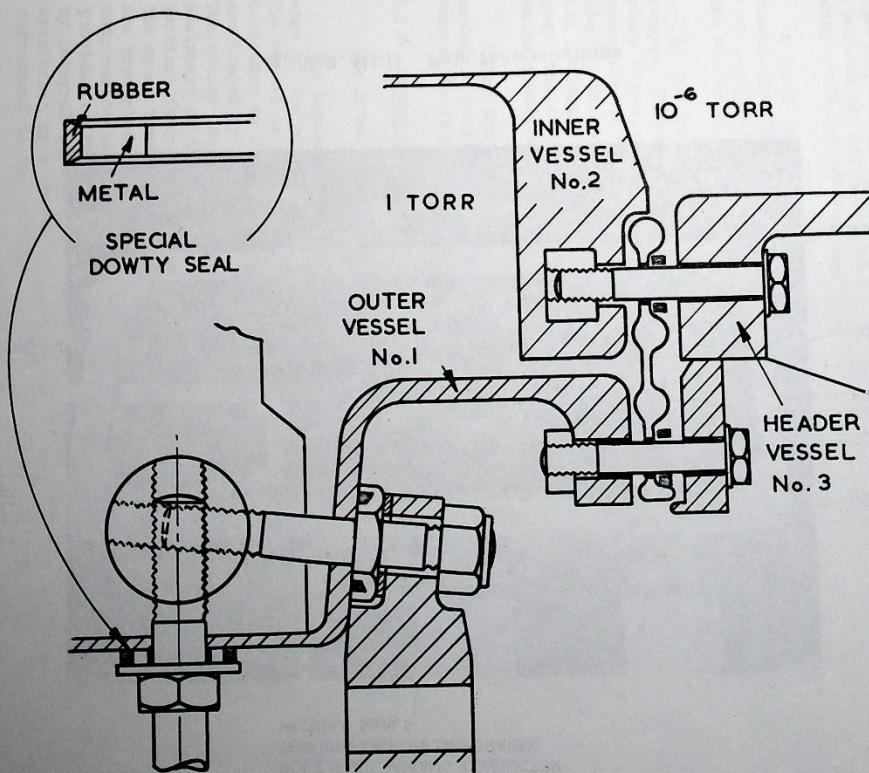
(ii) Vacuum vessel sealing arrangement.
